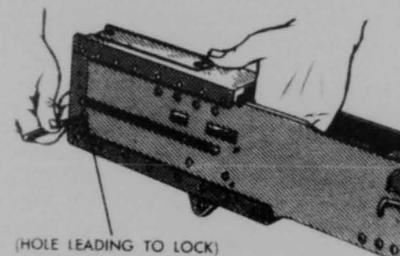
Disengaging Barrel Buffer Body Spring Lock.
